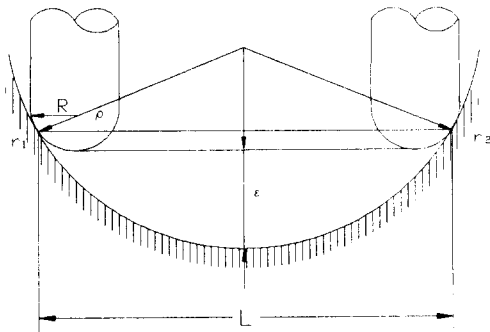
The Tolerance in Machining of a Concave Surface
